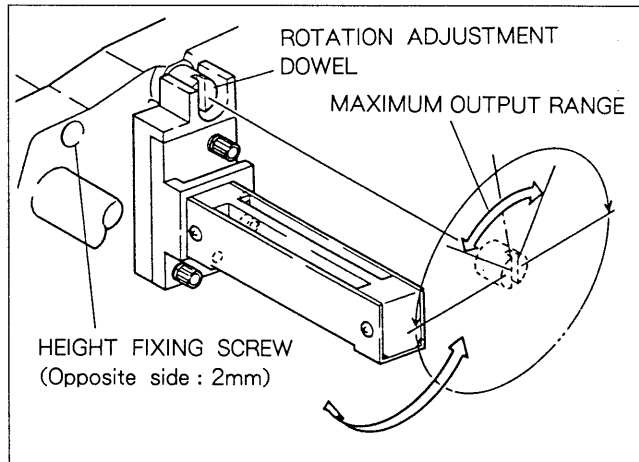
Audio PB Head Rotation Adjustment
